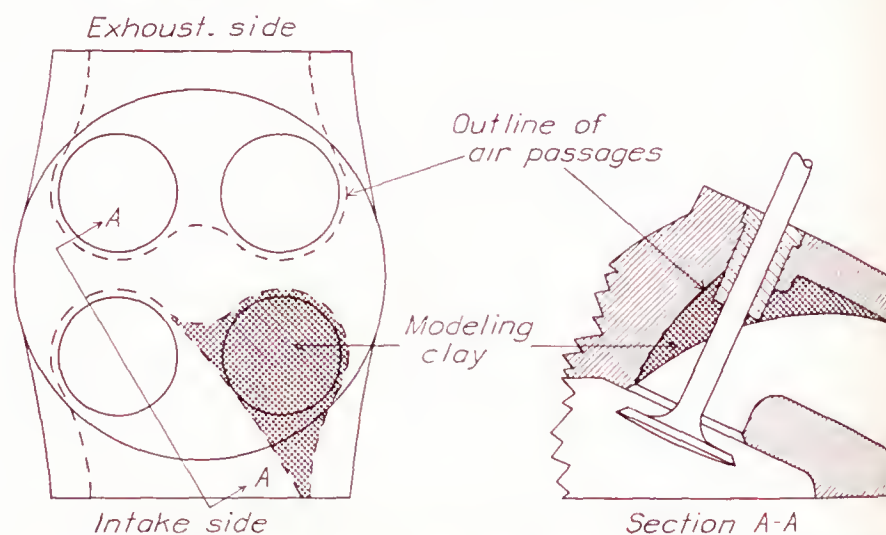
Sketch showing parts of intake-air passage in cylinder head filled with modeling clay.
